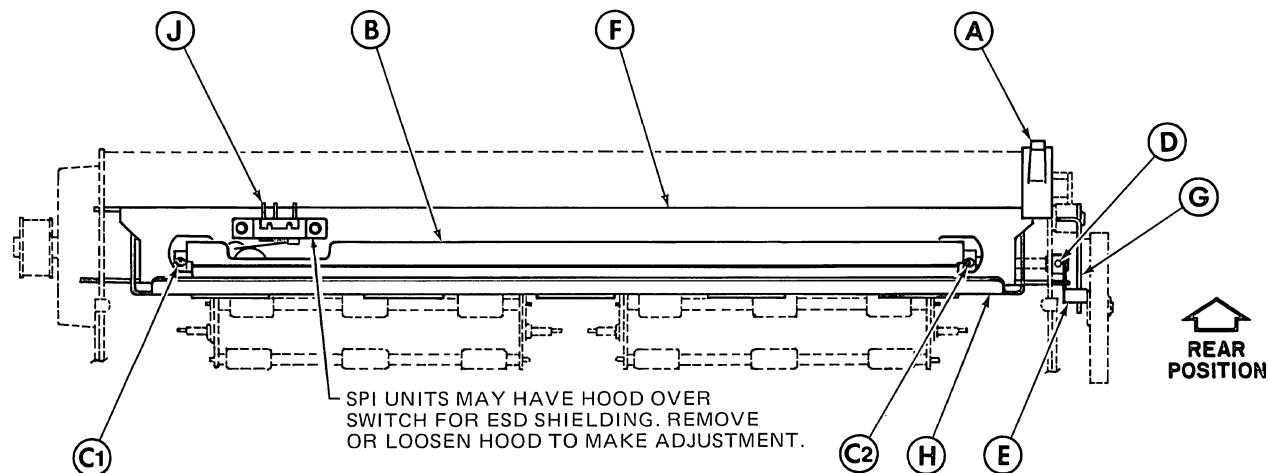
TOP PAPER OUT BAIL AND SWITCH ADJUSTMENT
